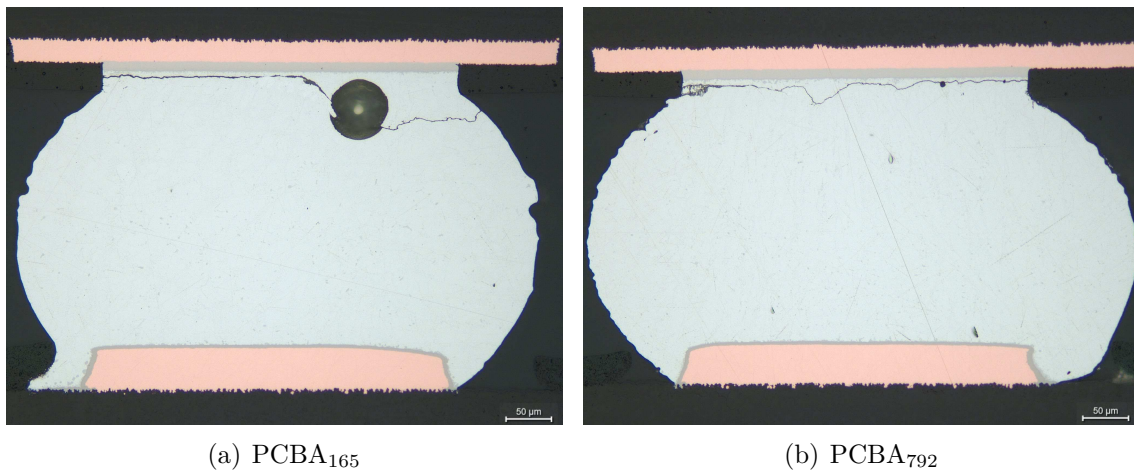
Cross section of solderings from two PCBAs inspected in optical microscope. Magnified 200 times.
